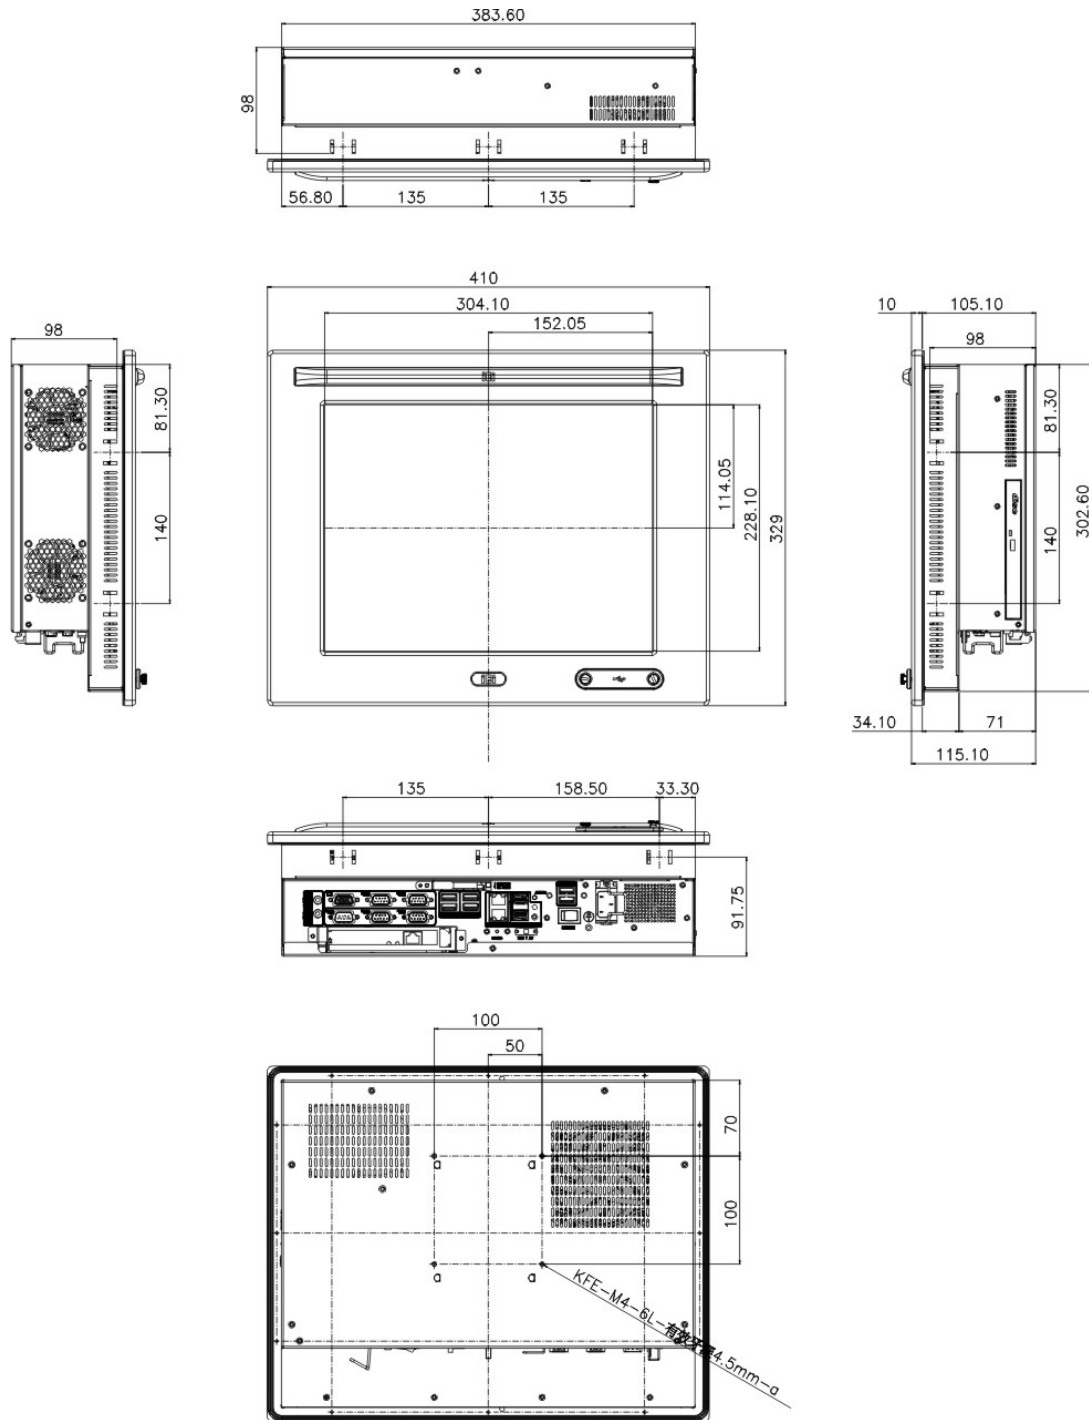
WIDS-515A-H61 Dimensions (mm)
